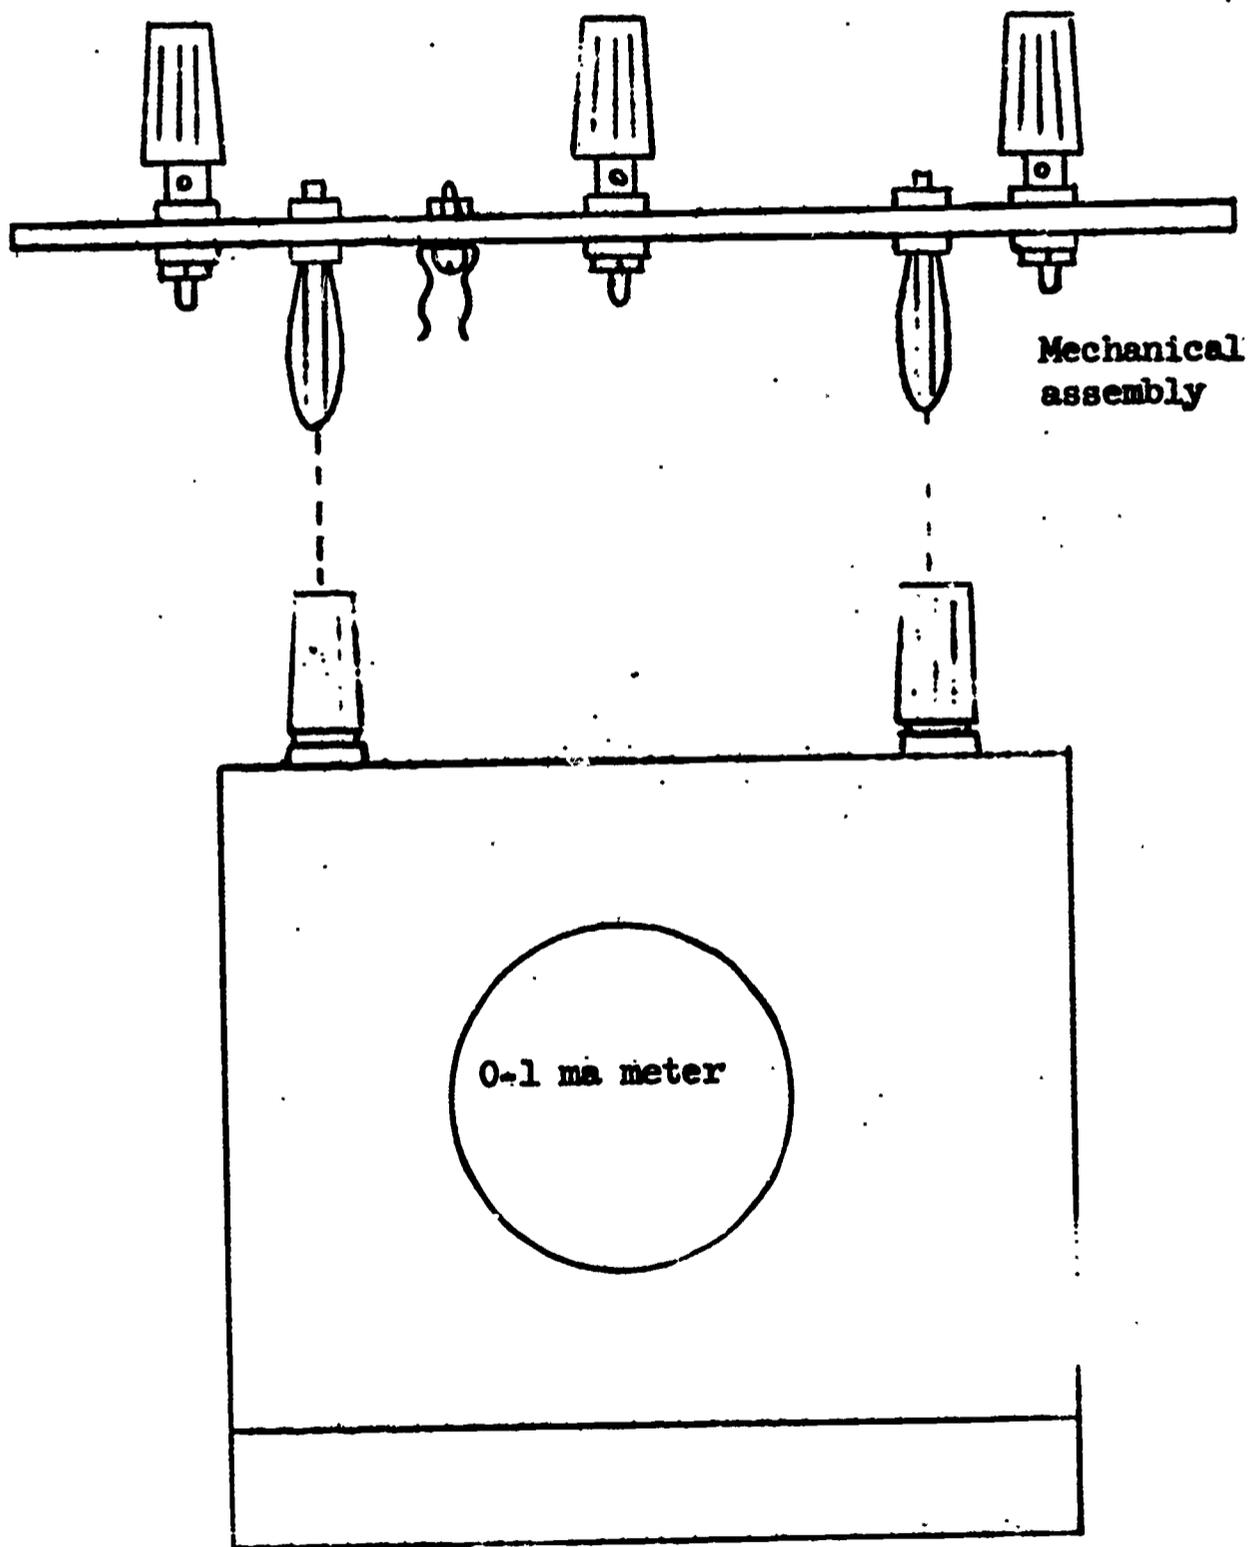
The mechanical assembly is designed to plug into a 0-1 ma meter
